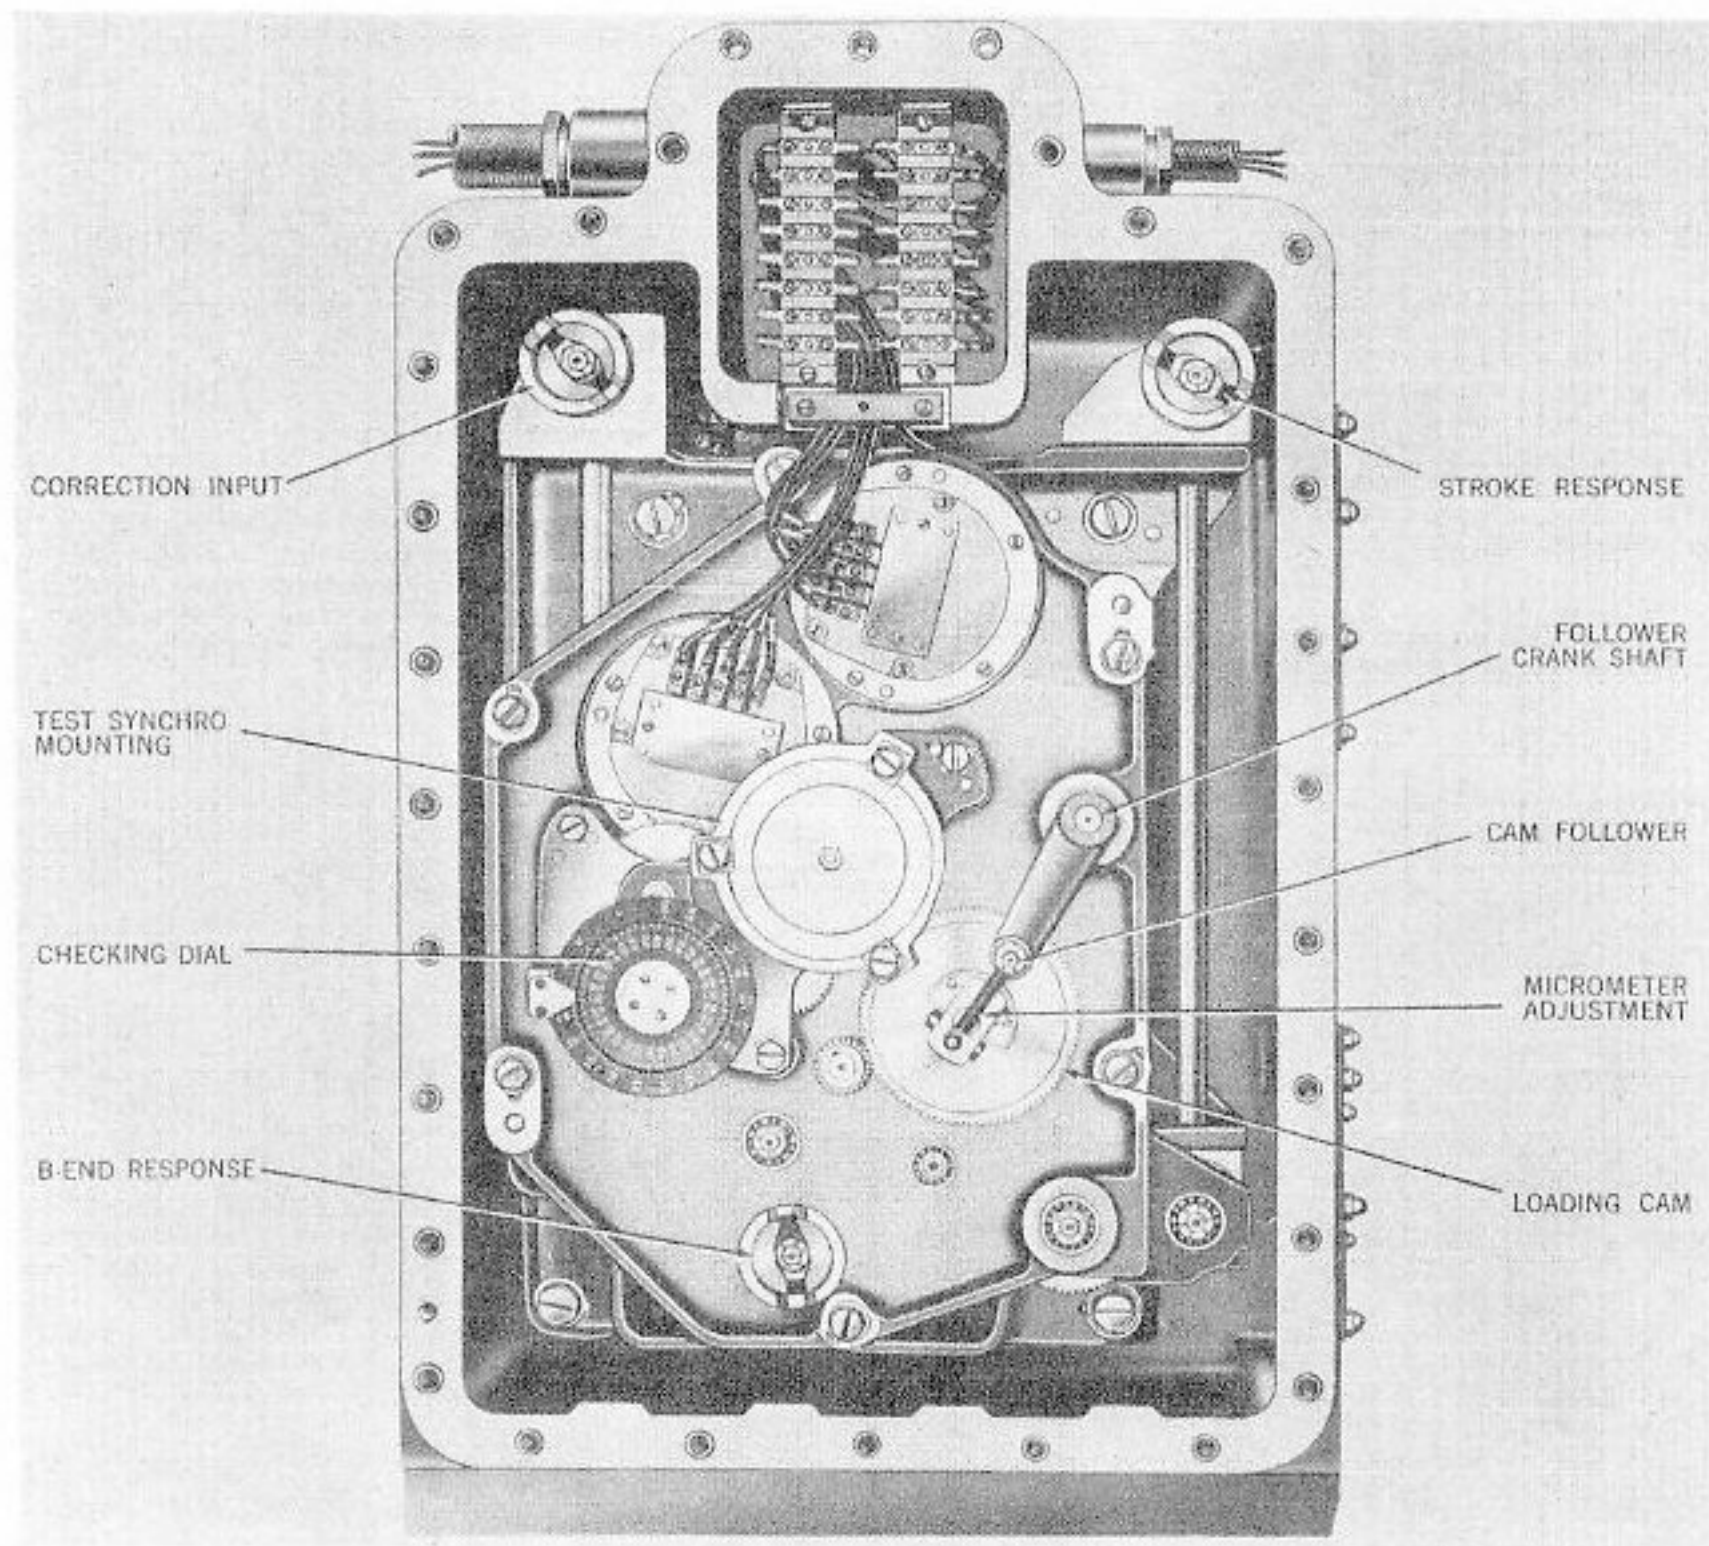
Elevation Receiver - Regulator Mk 10 Mod 0, Rear View - Back Plate Removed
